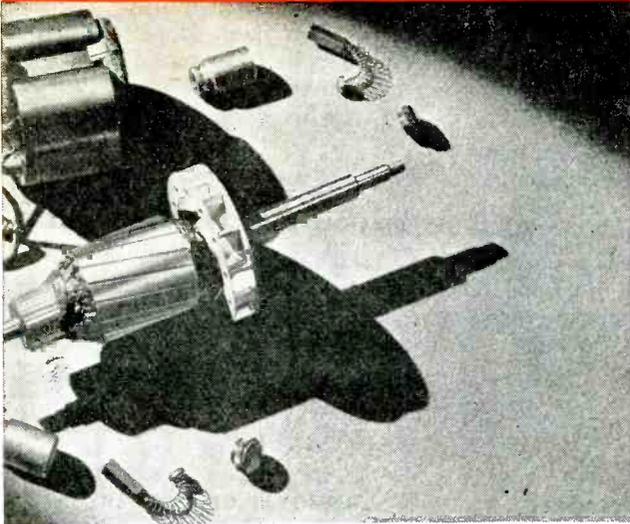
Components used in a series motor that appears in vacuum cleaners, mixers, reamers, etc. (Courtesy G. E.)
